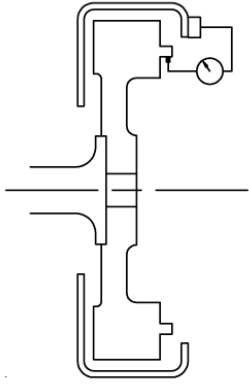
Checking Driving Ring Pilot Bore of Flywheel
